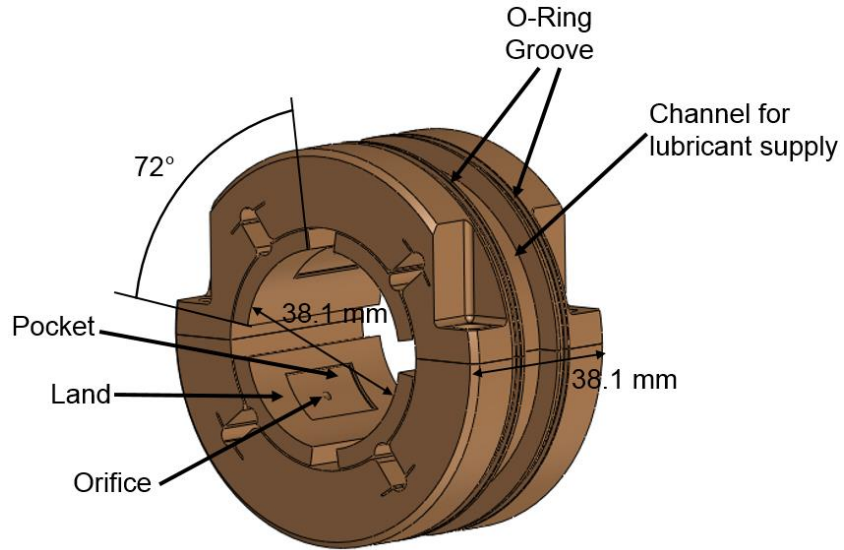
Water lubricated flexure pivot pad hydrostatic journal bearings with key dimensions and features labeled [9].
